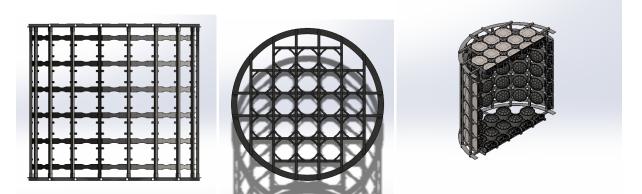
Drawings of the WCTE mPMT support frame. Left: A side view of the barrel region. Middle: A top view of the bottom and top end caps. Right: A cross section view of the support frame with mPMTs mounted.
